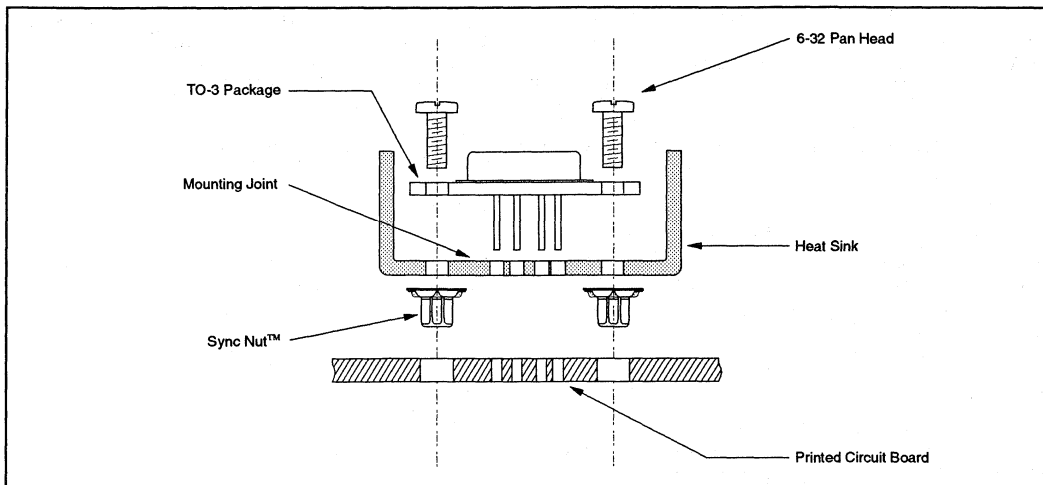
B. Low Power Application Using Printed Circuit Board.
